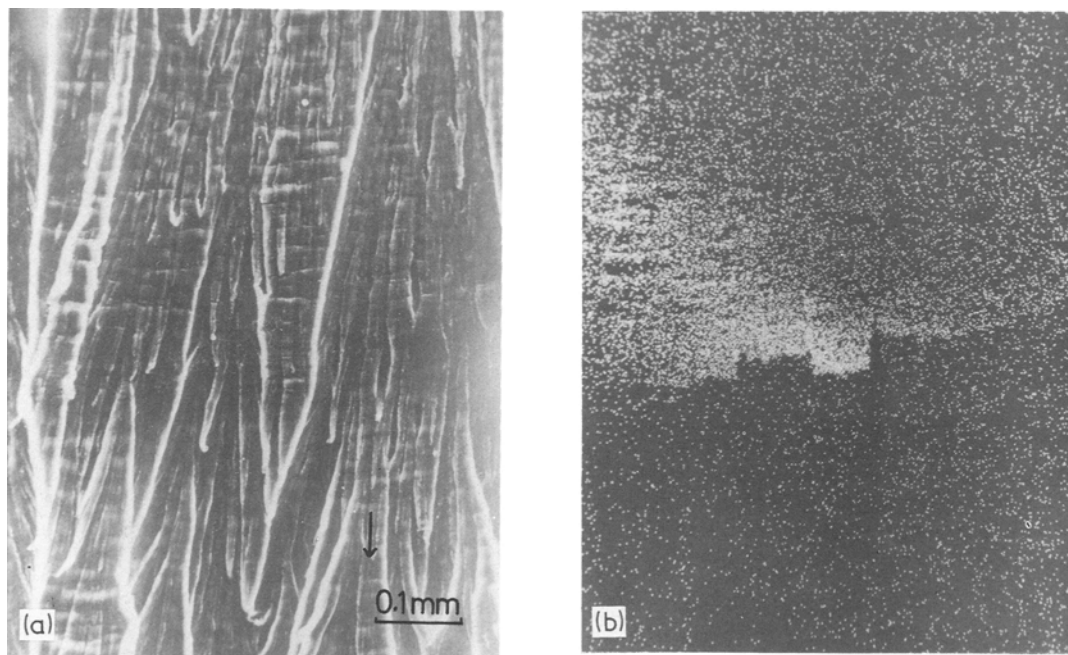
Another part of the fracture surface shown in Fig. 2. (a) SEI, (b) Al X-ray image. Aluminium evaporation was performed after 810 cycles.
